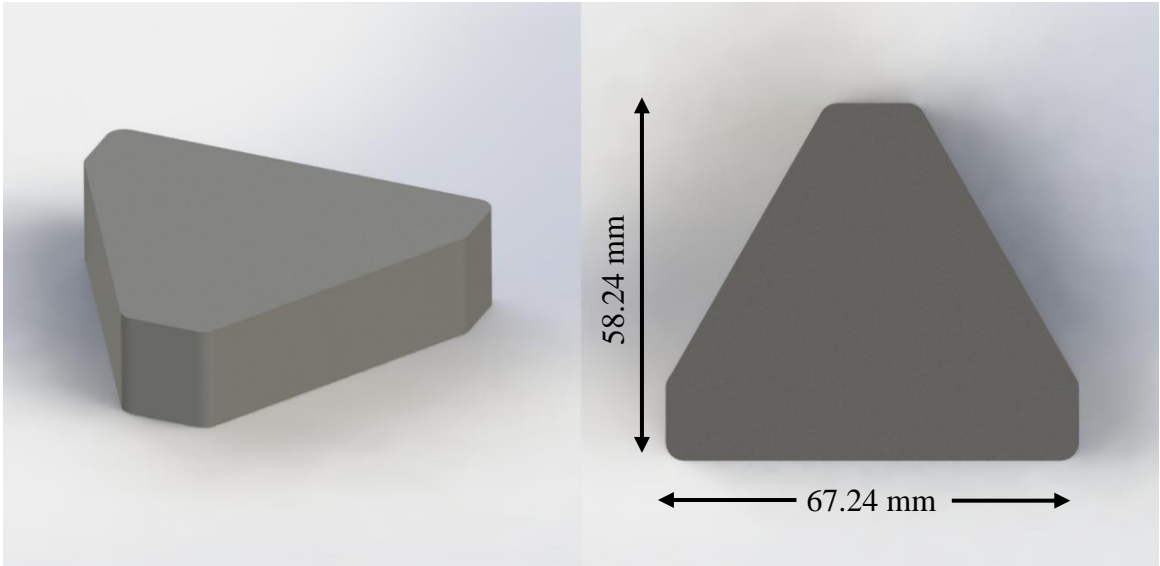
SolidWorks rendering of half-feed combine harvester large bottom blade blanking punch
